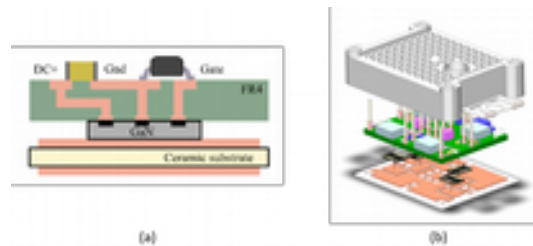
Example of substrate-embedded GaN transistor [3]: (a) cross-sectional view (b) assembly
